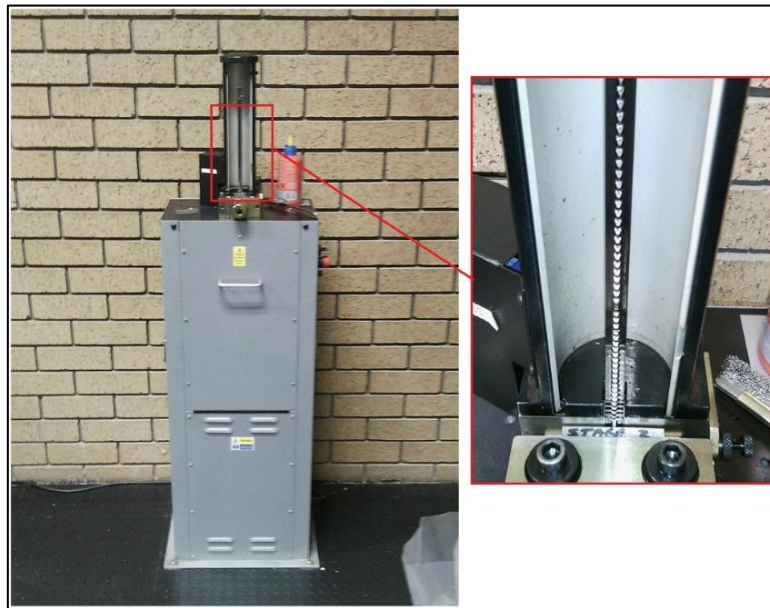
Cutting machine for V-Notch for CVN specimen.
